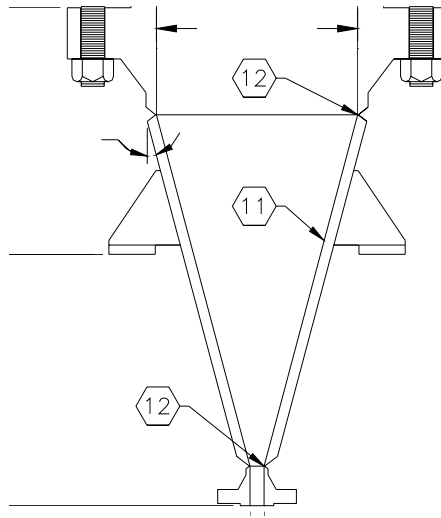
Conical Injector Chamber (Drawing 7RE6392)
